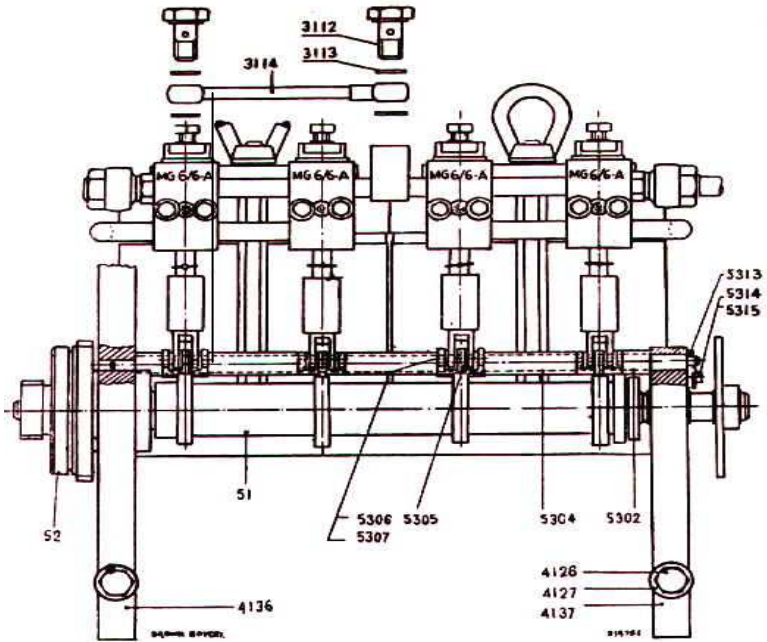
CONTROL UNIT ASSEMBLY
